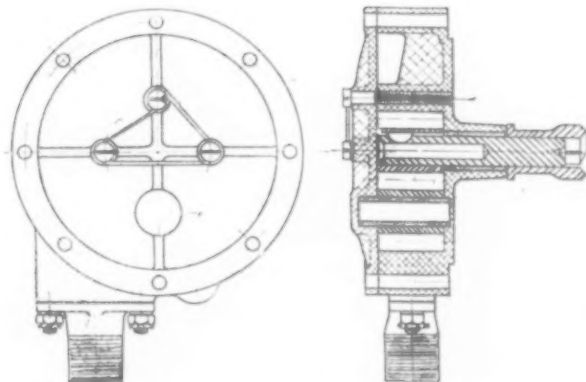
OIL-SUCTION-PUMP ASSEMBLY
